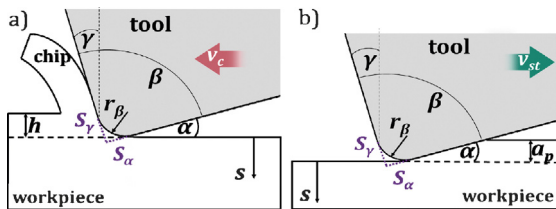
Contact conditions for Complementary Machining. a) machining, b) mechanical surface modification.
